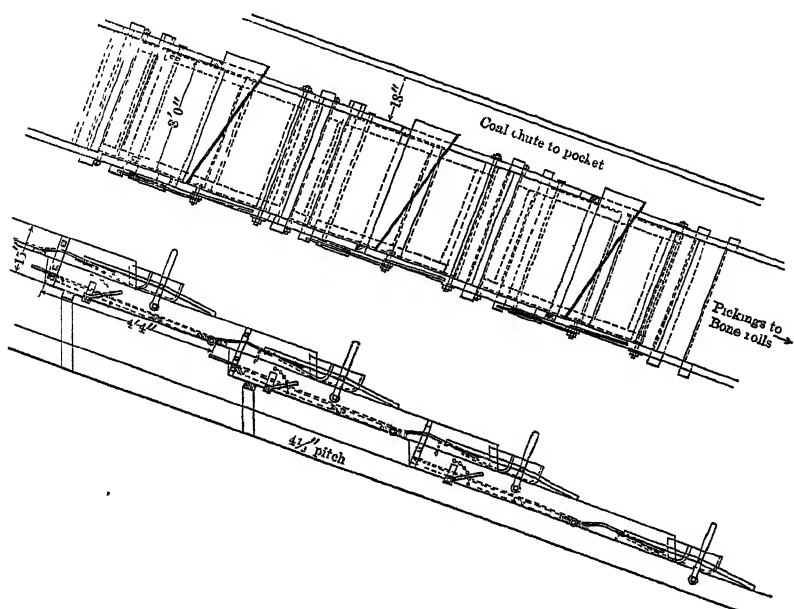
PLAN AND SECTION OF GRAVITY PICKER.
